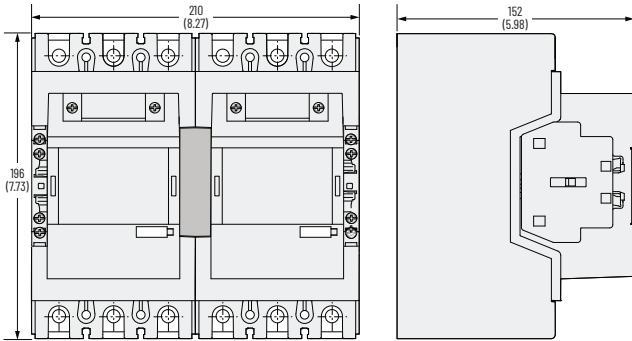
104-E265...104-E370 Reversing Contactors with Cat. No. 100-EM... Mechanical Interlock
